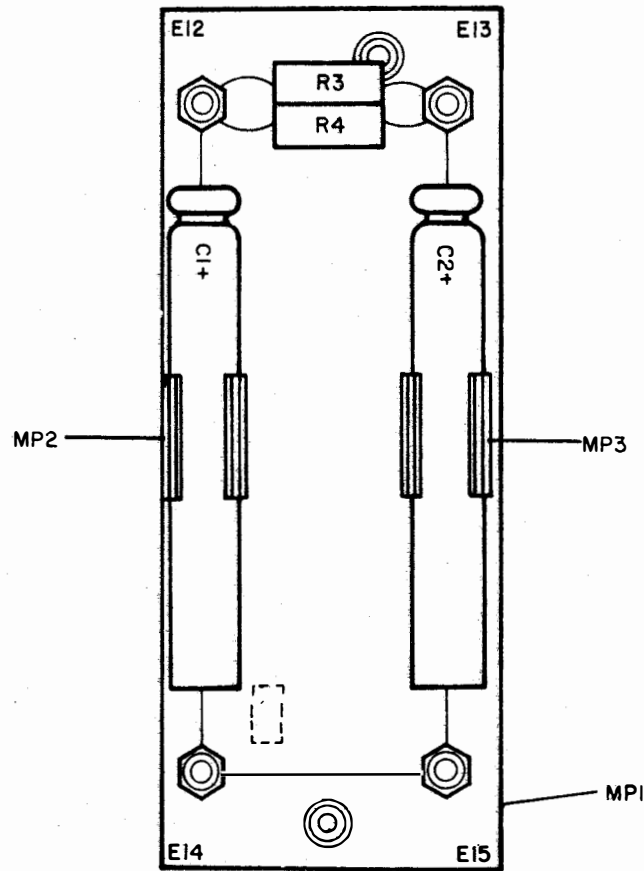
Filter Assembly A2A6A7, Component Locations
